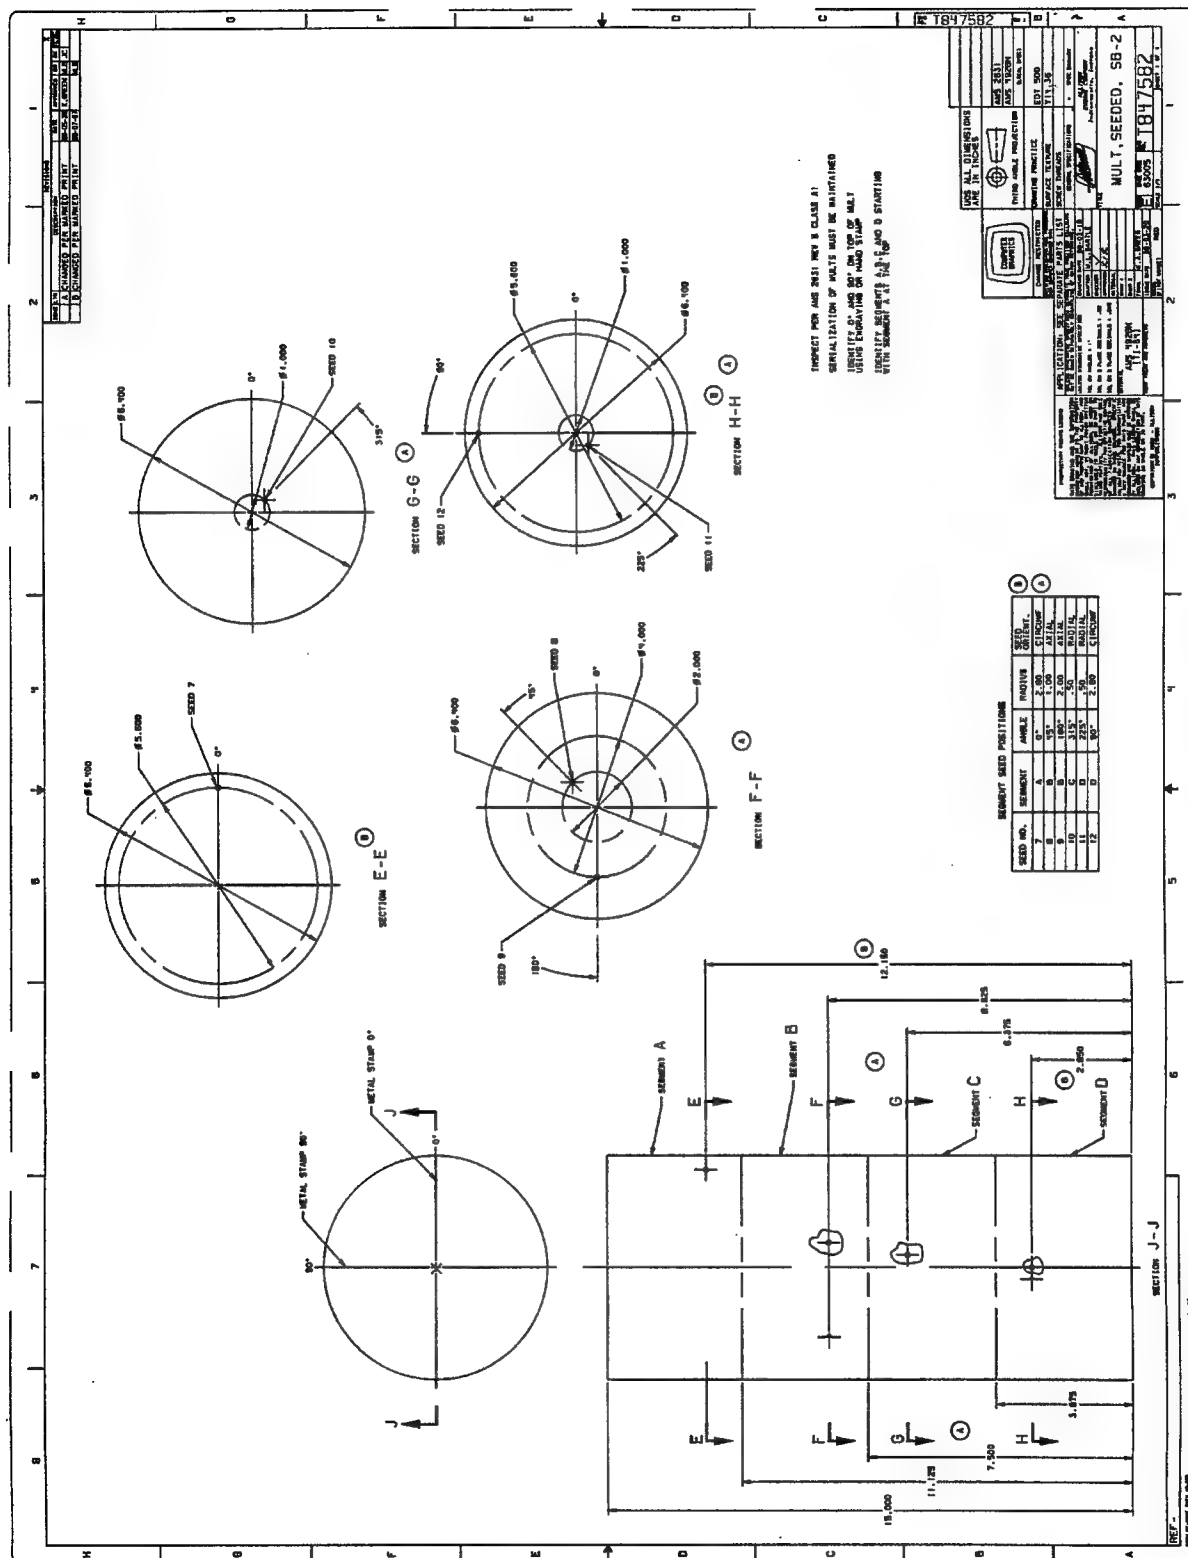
ENGINEERING DRAWING OF SEED PLACEMENT IN MULT SB-2
